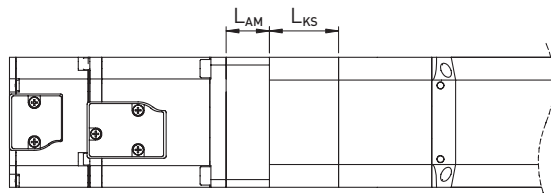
HM-S linear axis motor connection without belt drive
